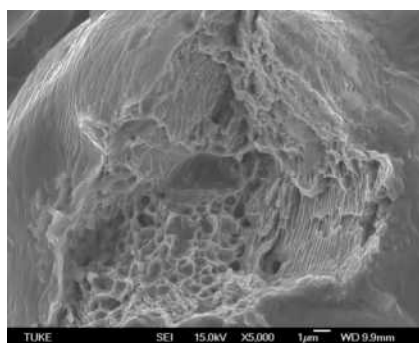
Fracture surface of material cooled at 6 K/s rate
